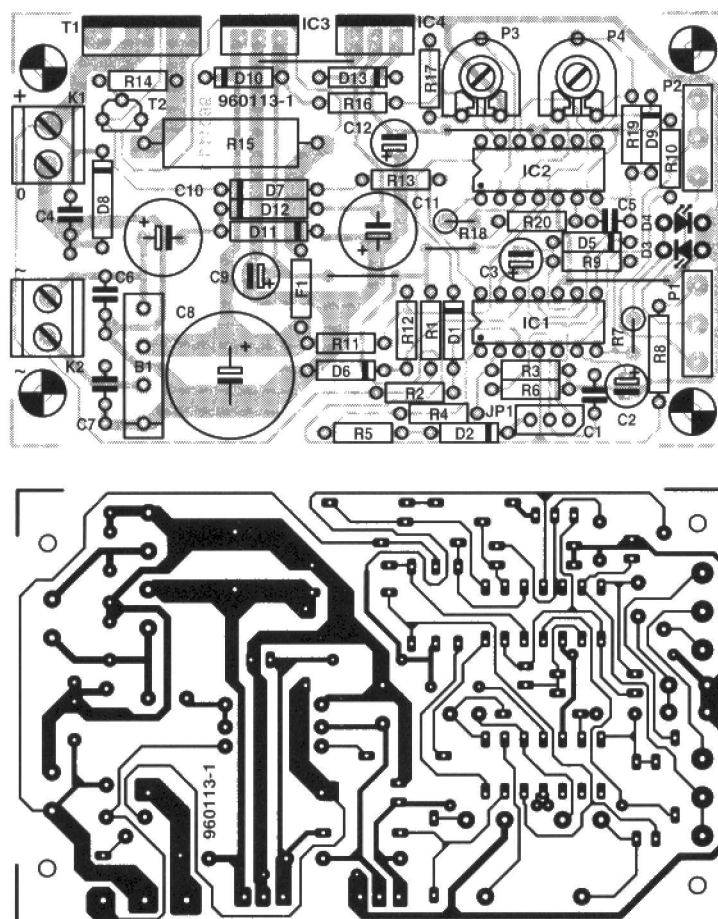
Track layout and component mounting plan of the PCB designed for the speed controller (board available ready made through the Readers Services).
